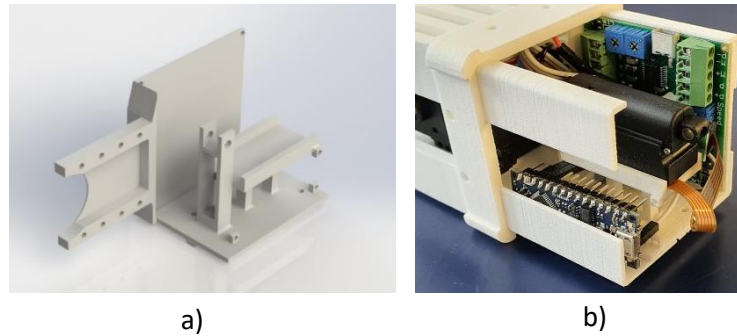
Module insert a) final design of the internal tray b) manufactured tray with components packaged
